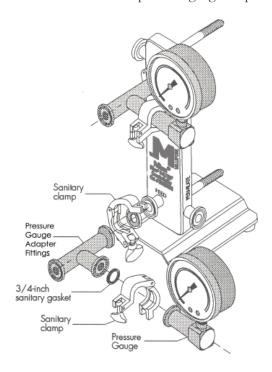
Attaching the Pressure Gauge to the Pressure Gauge Adapter Fittings
